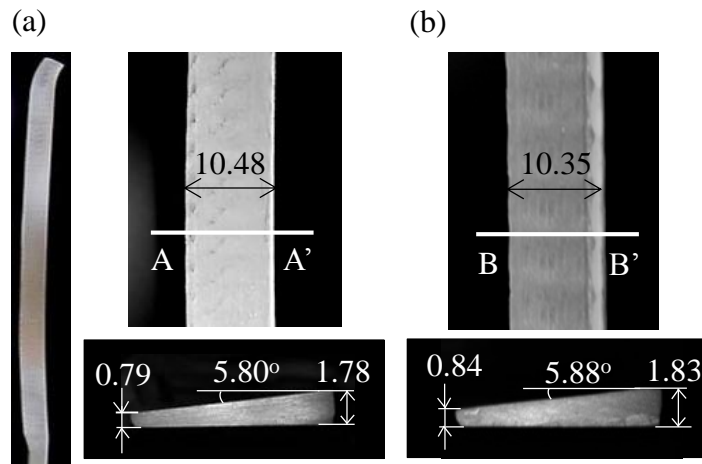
Forged plates having inclined cross-section with side guide and taper bottom punch for (a)  $t = 2$  mm,  $f = 3$  mm and (b)  $t = 2$  mm,  $f = 5$  mm.
